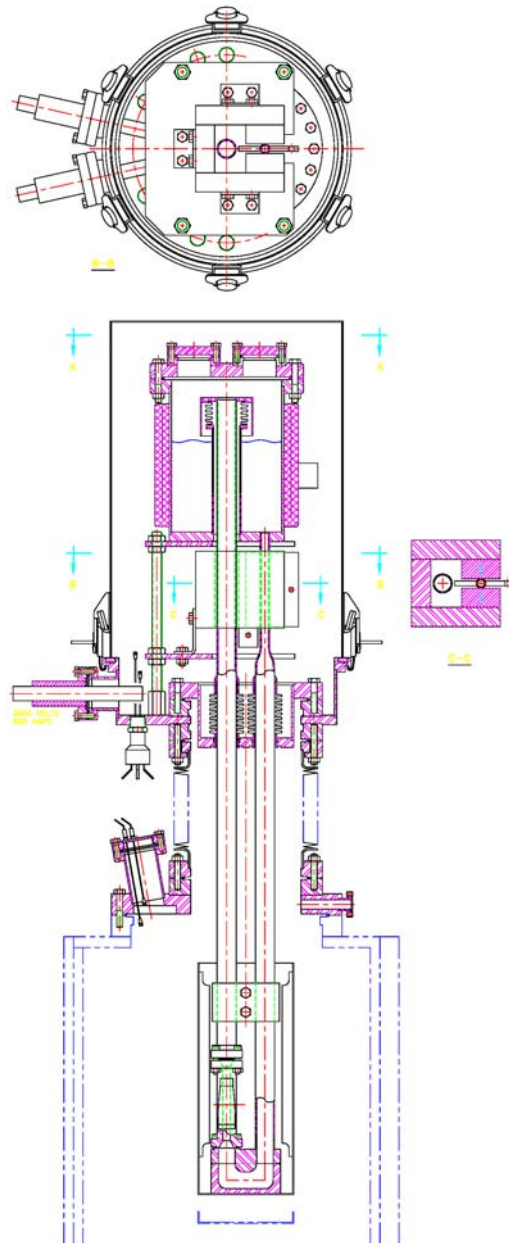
Drawing of the mechanical layout of the liquid-lithium loop. The mechanism can move vertically with respect to the beam in order to vary the target thickness or to withdraw the mechanism to make room for the standard target ladder. A section view of the permanent-magnet pump is shown to the right.
